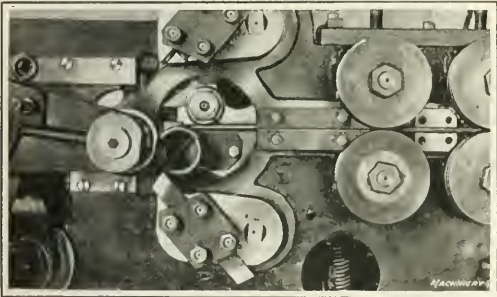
Close View of Coiling Mechanism on Sleeper & Hartley No. 5 Spring Coiler
